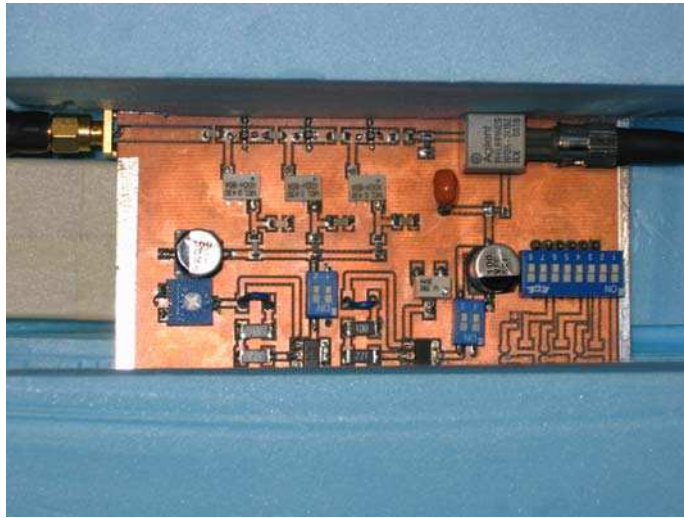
PCB layout for the fibre optic receiver when being housed inside the metal box
